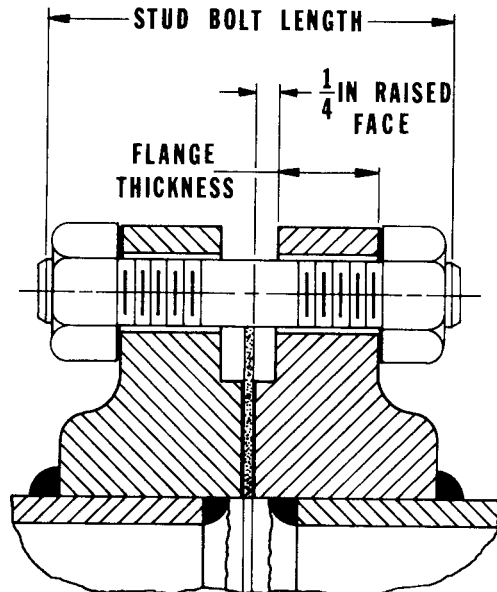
Flange Stud Bolt Assembly for 400-psi and Above Flanges
